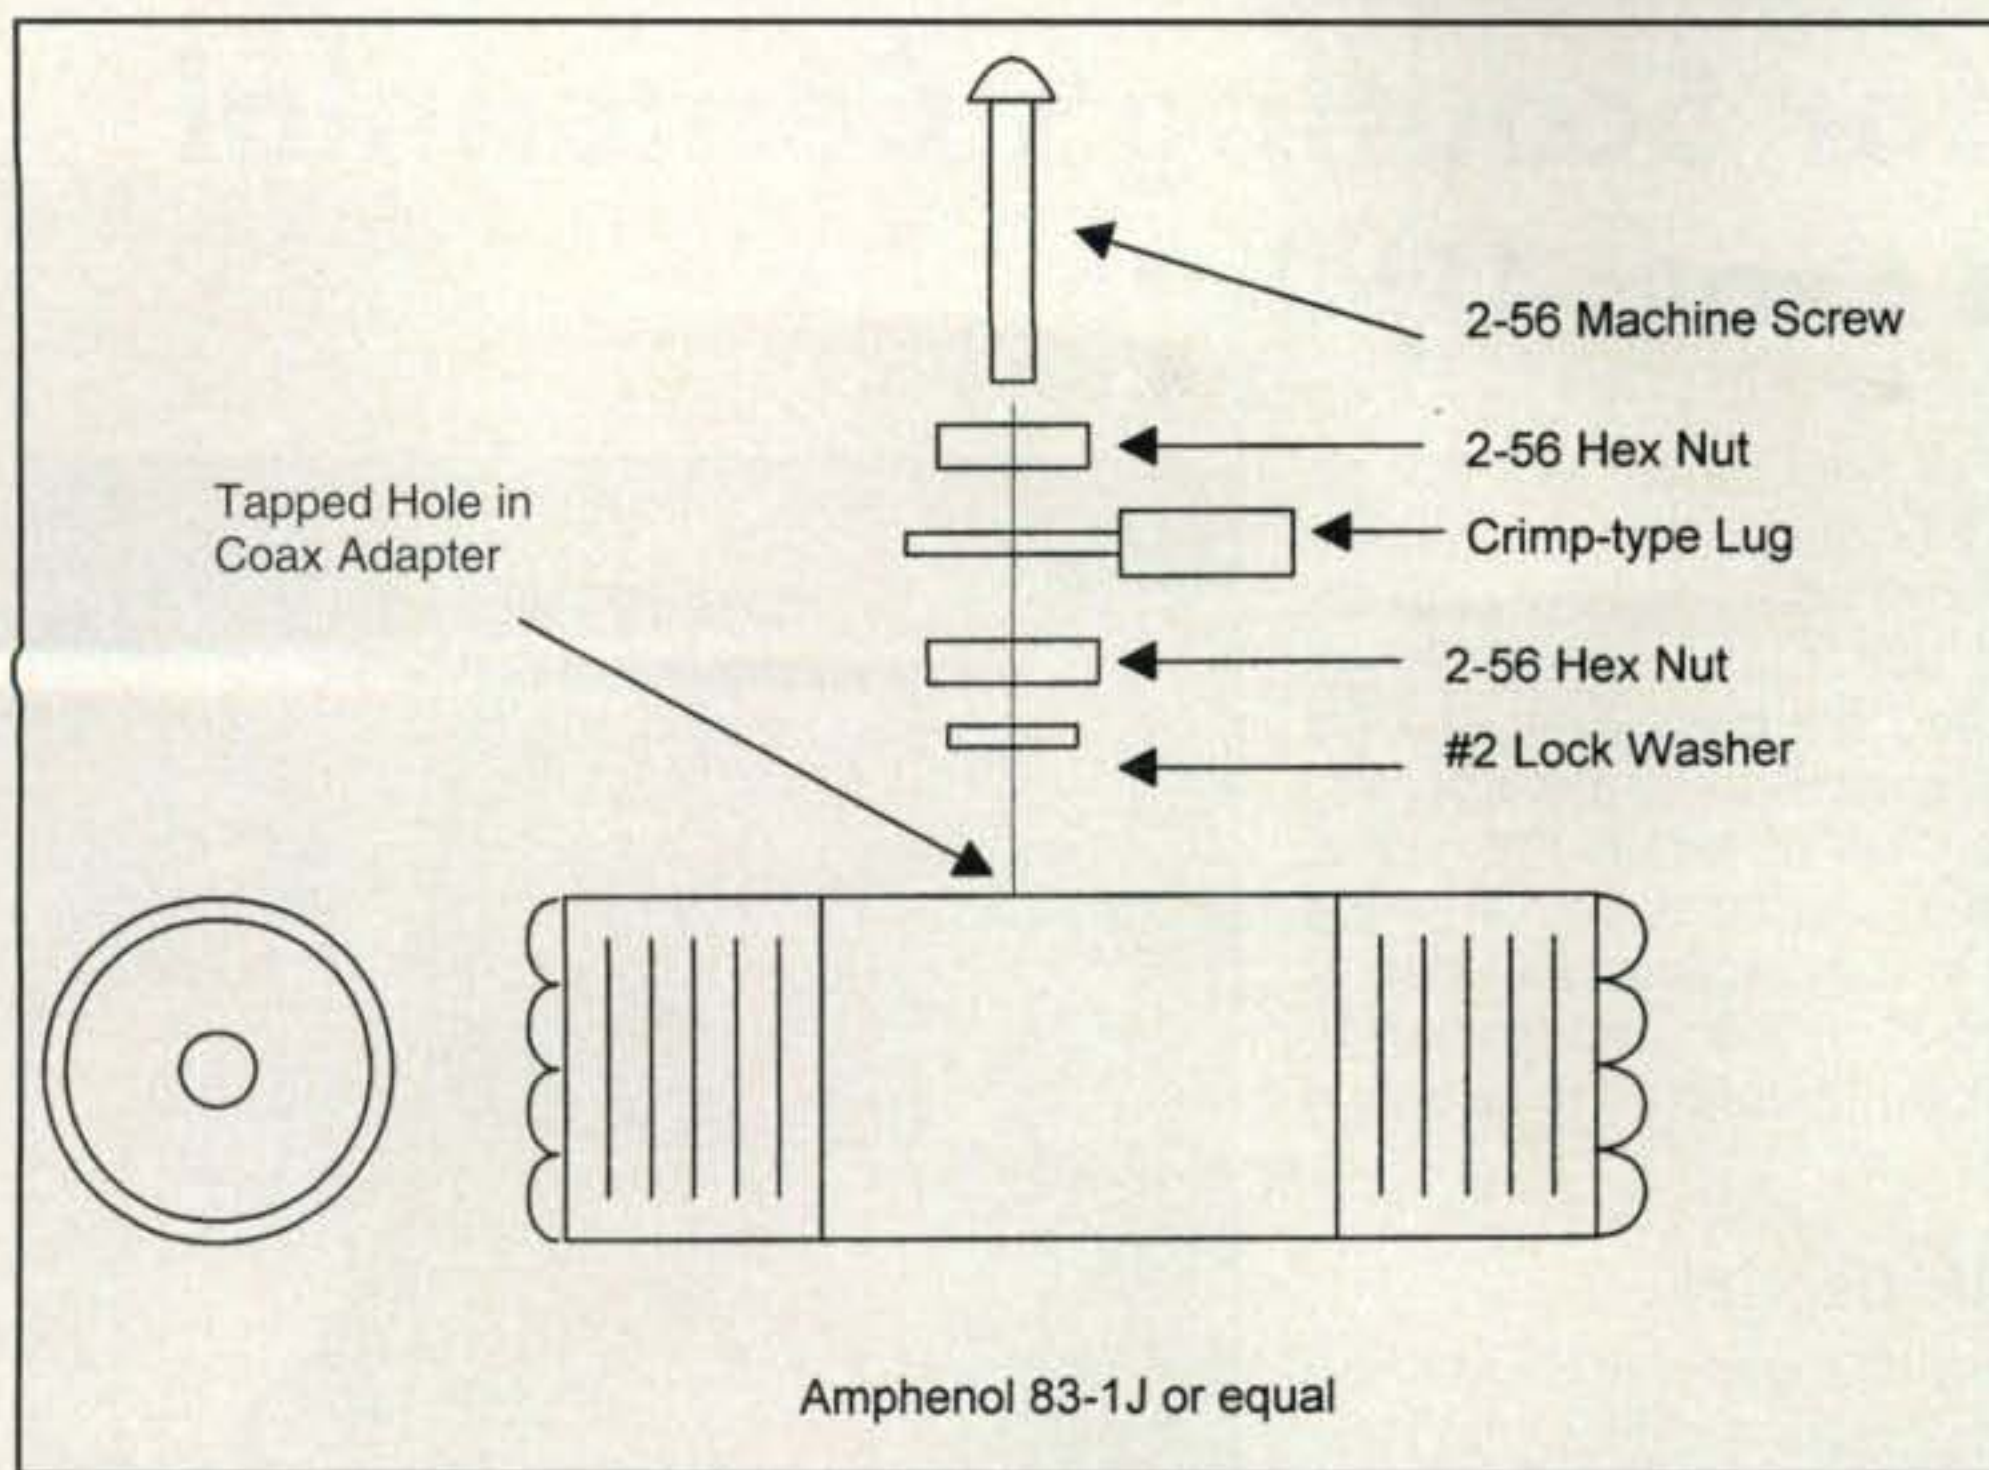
Component assembly details of the coaxial-cable lightning arrestor.
